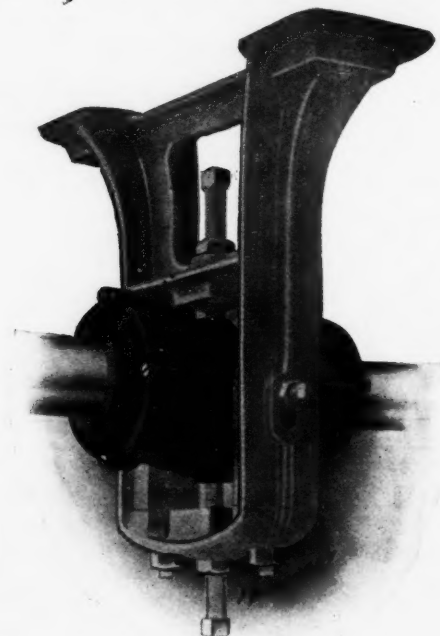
The Fafnir Ball Bearing Box for Lineshaft Hangers
